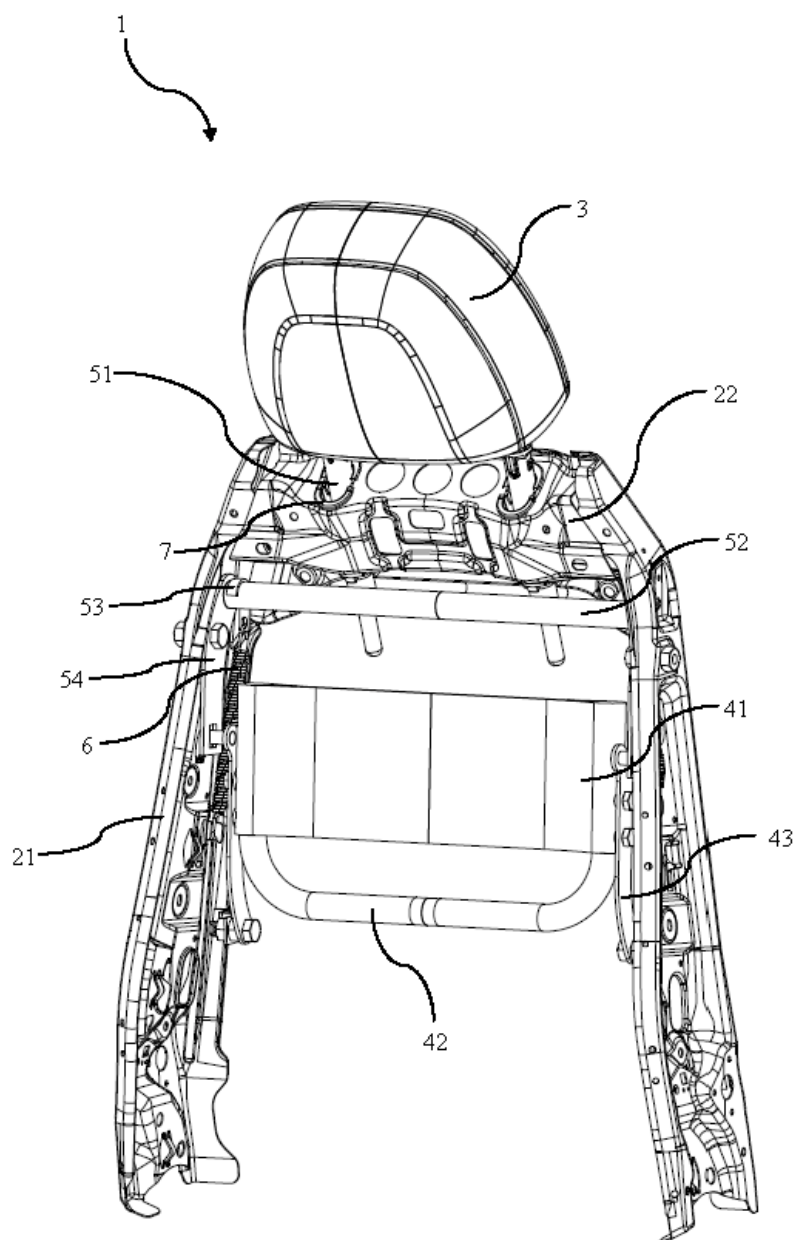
Perspective view of a vehicle seat with a quick forward mechanism
